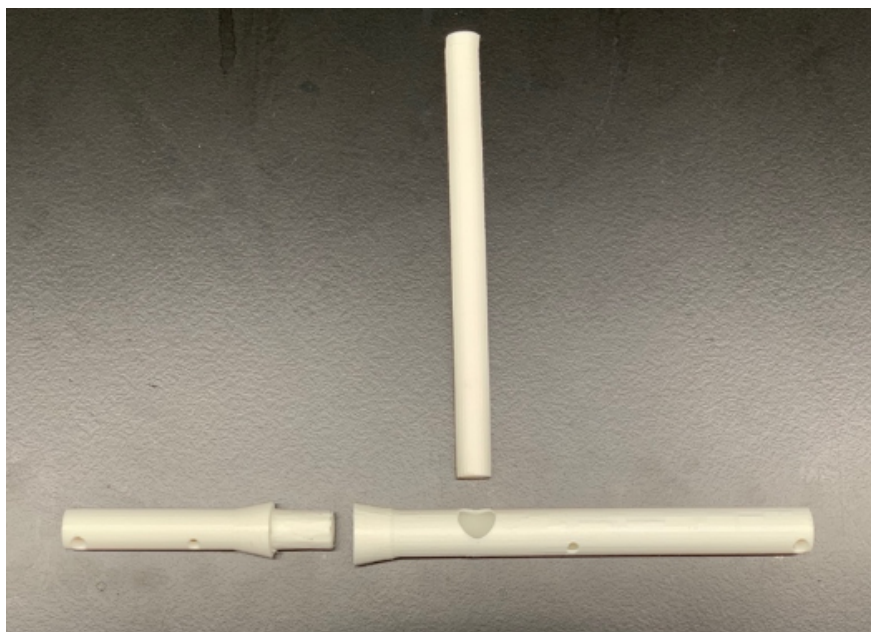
Figure S11. Layout for the 3D printed parts of the swimming device. All connecting wires can go inside the parts to avoid cluster and keep neat.
